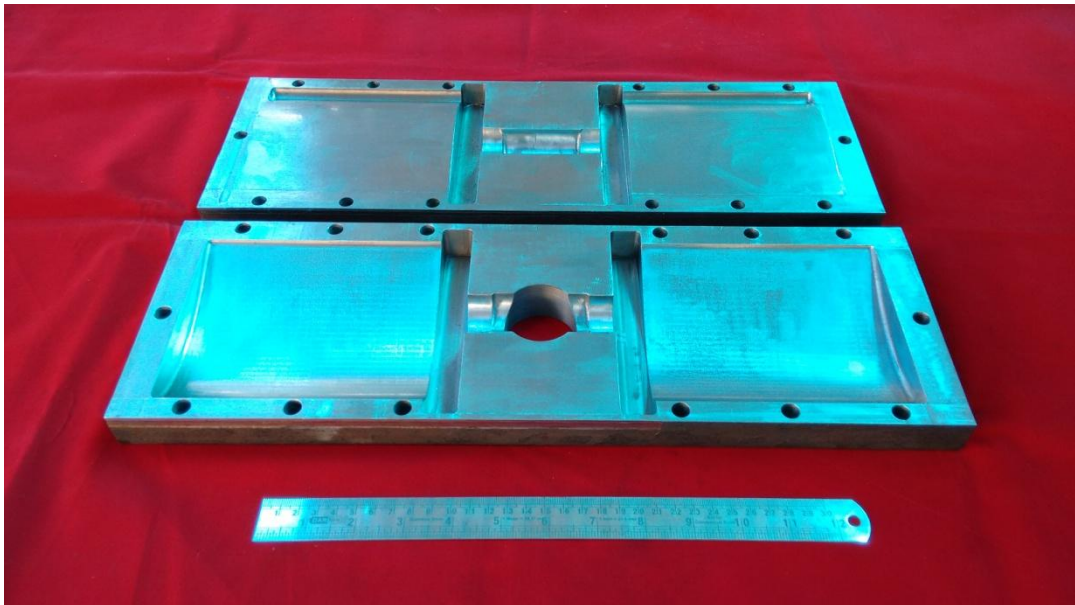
Fabricated mould for the centrifugal casting of the turbine exit vane guide
